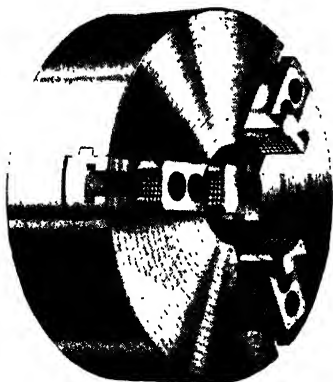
Three-Jaw Concentric Chuck with Detachable Jaws.
